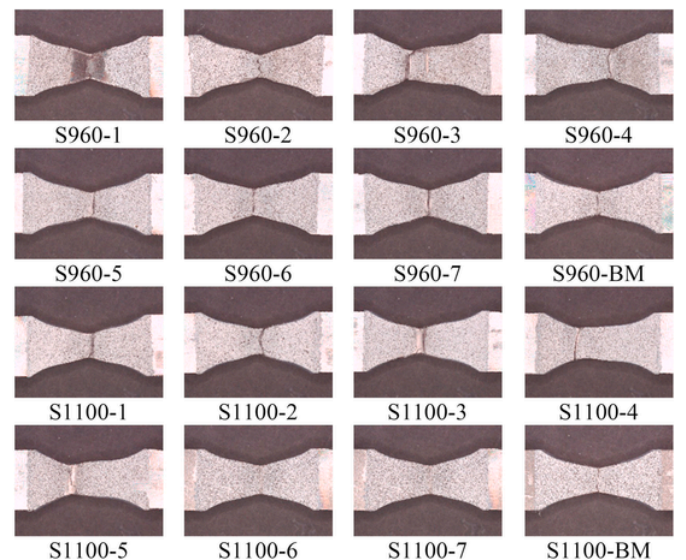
Tensile test specimens after fracture (fracture location is visible from the painted area).
